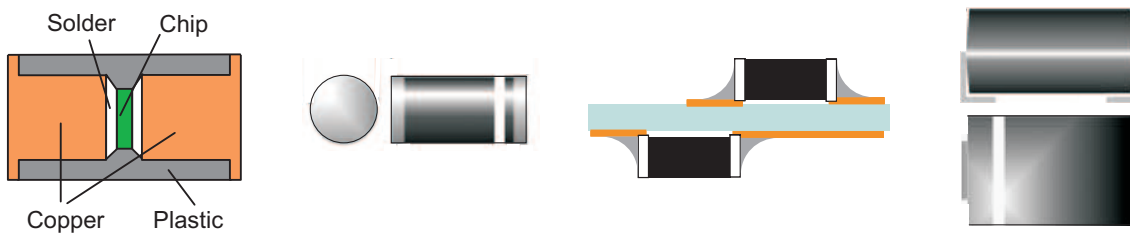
From left to right: Layout of a Metal Electrode Faces (MELF) diode, view of a MELF diode, double-sided PCB assembly of MELFs, block-shaped SMD diode
